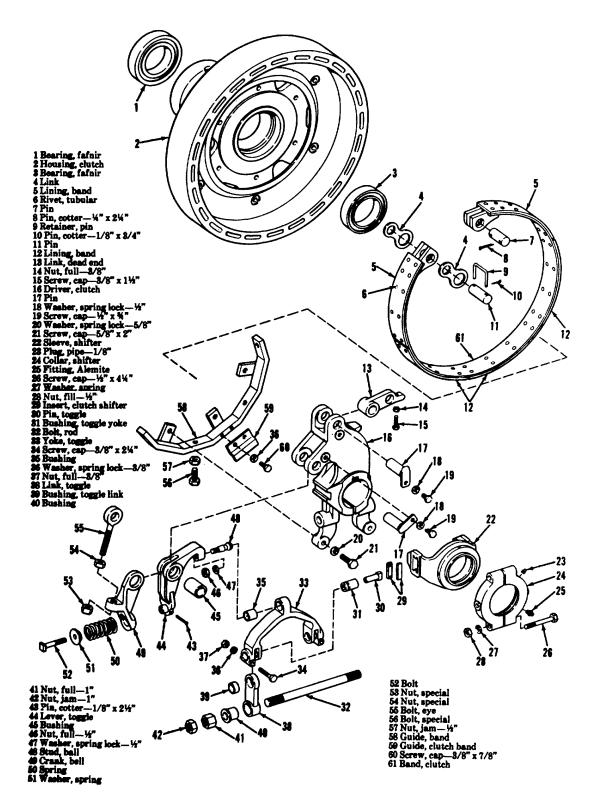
Rear and front drum shaft assembly, exploded view (sheet 3 of 3).
